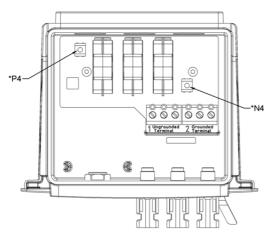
Stringbox with DC fuse holders and blanking plug
